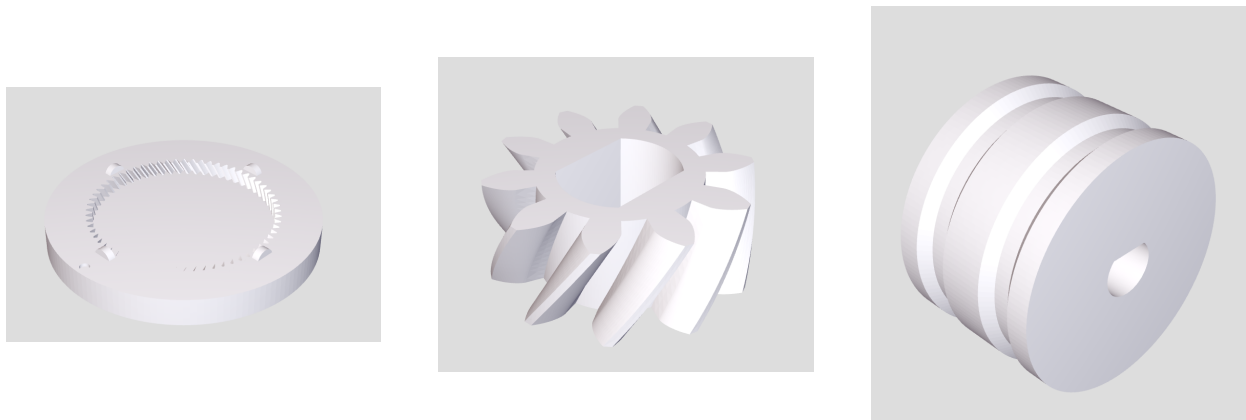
Selected 3D-printed parts: fixed base gear, motor pinion gear, and feed roller.
